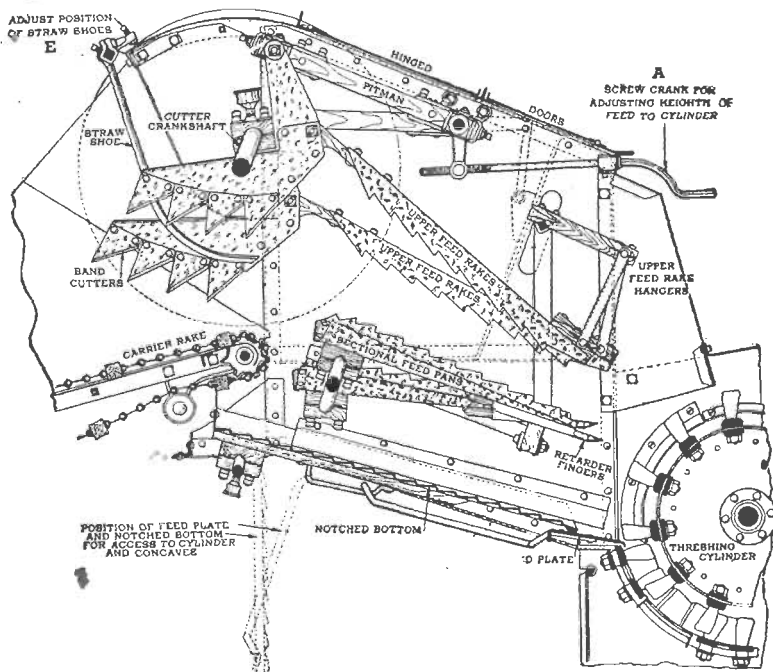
Sectional view of the parts making up the self-feeder and volume governor.
